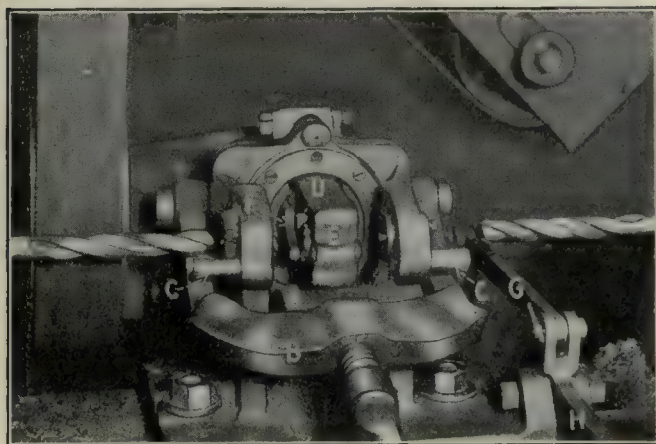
FIXTURE FOR MILLING INSIDE OF BOSSES
